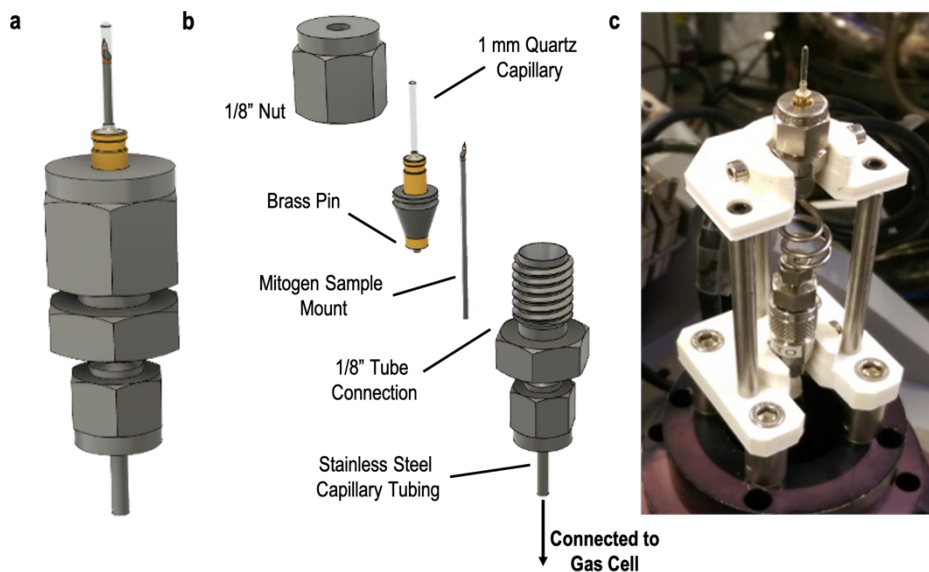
119 Beamline 1mm quartz capillary gas cell equipment. a) Technical drawing of the head of the cell with b) showing the exploded view. c) Image of the diffractometer mounted cell. Image adapted with kind permission from Dr Mark Warren, Diamond Light Source.⁵
